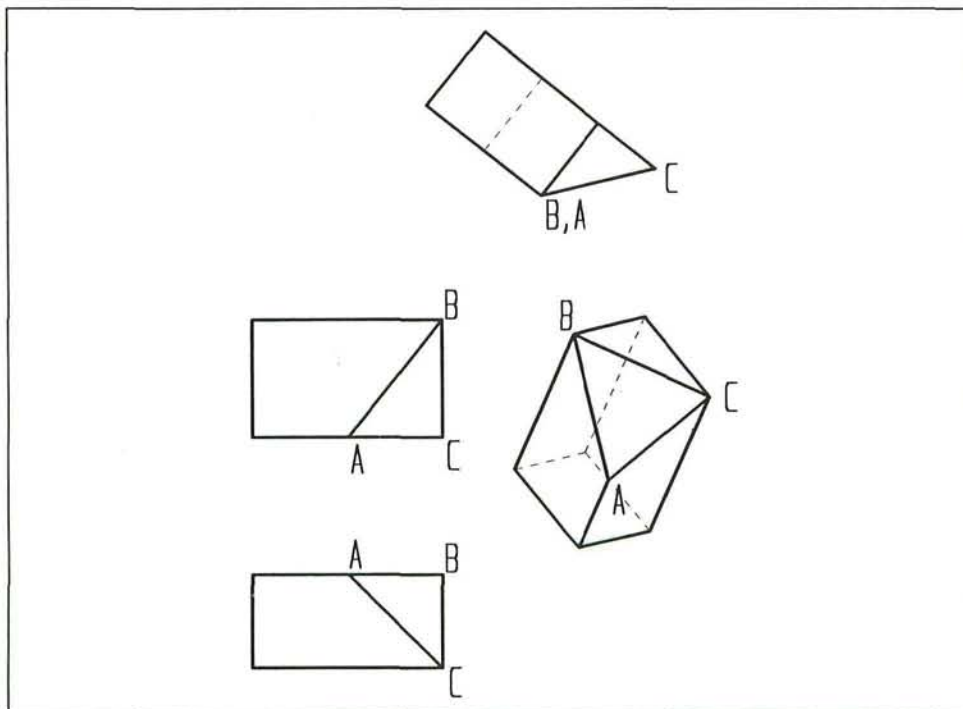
True size of an oblique surface - CAD technique with traditional views.
